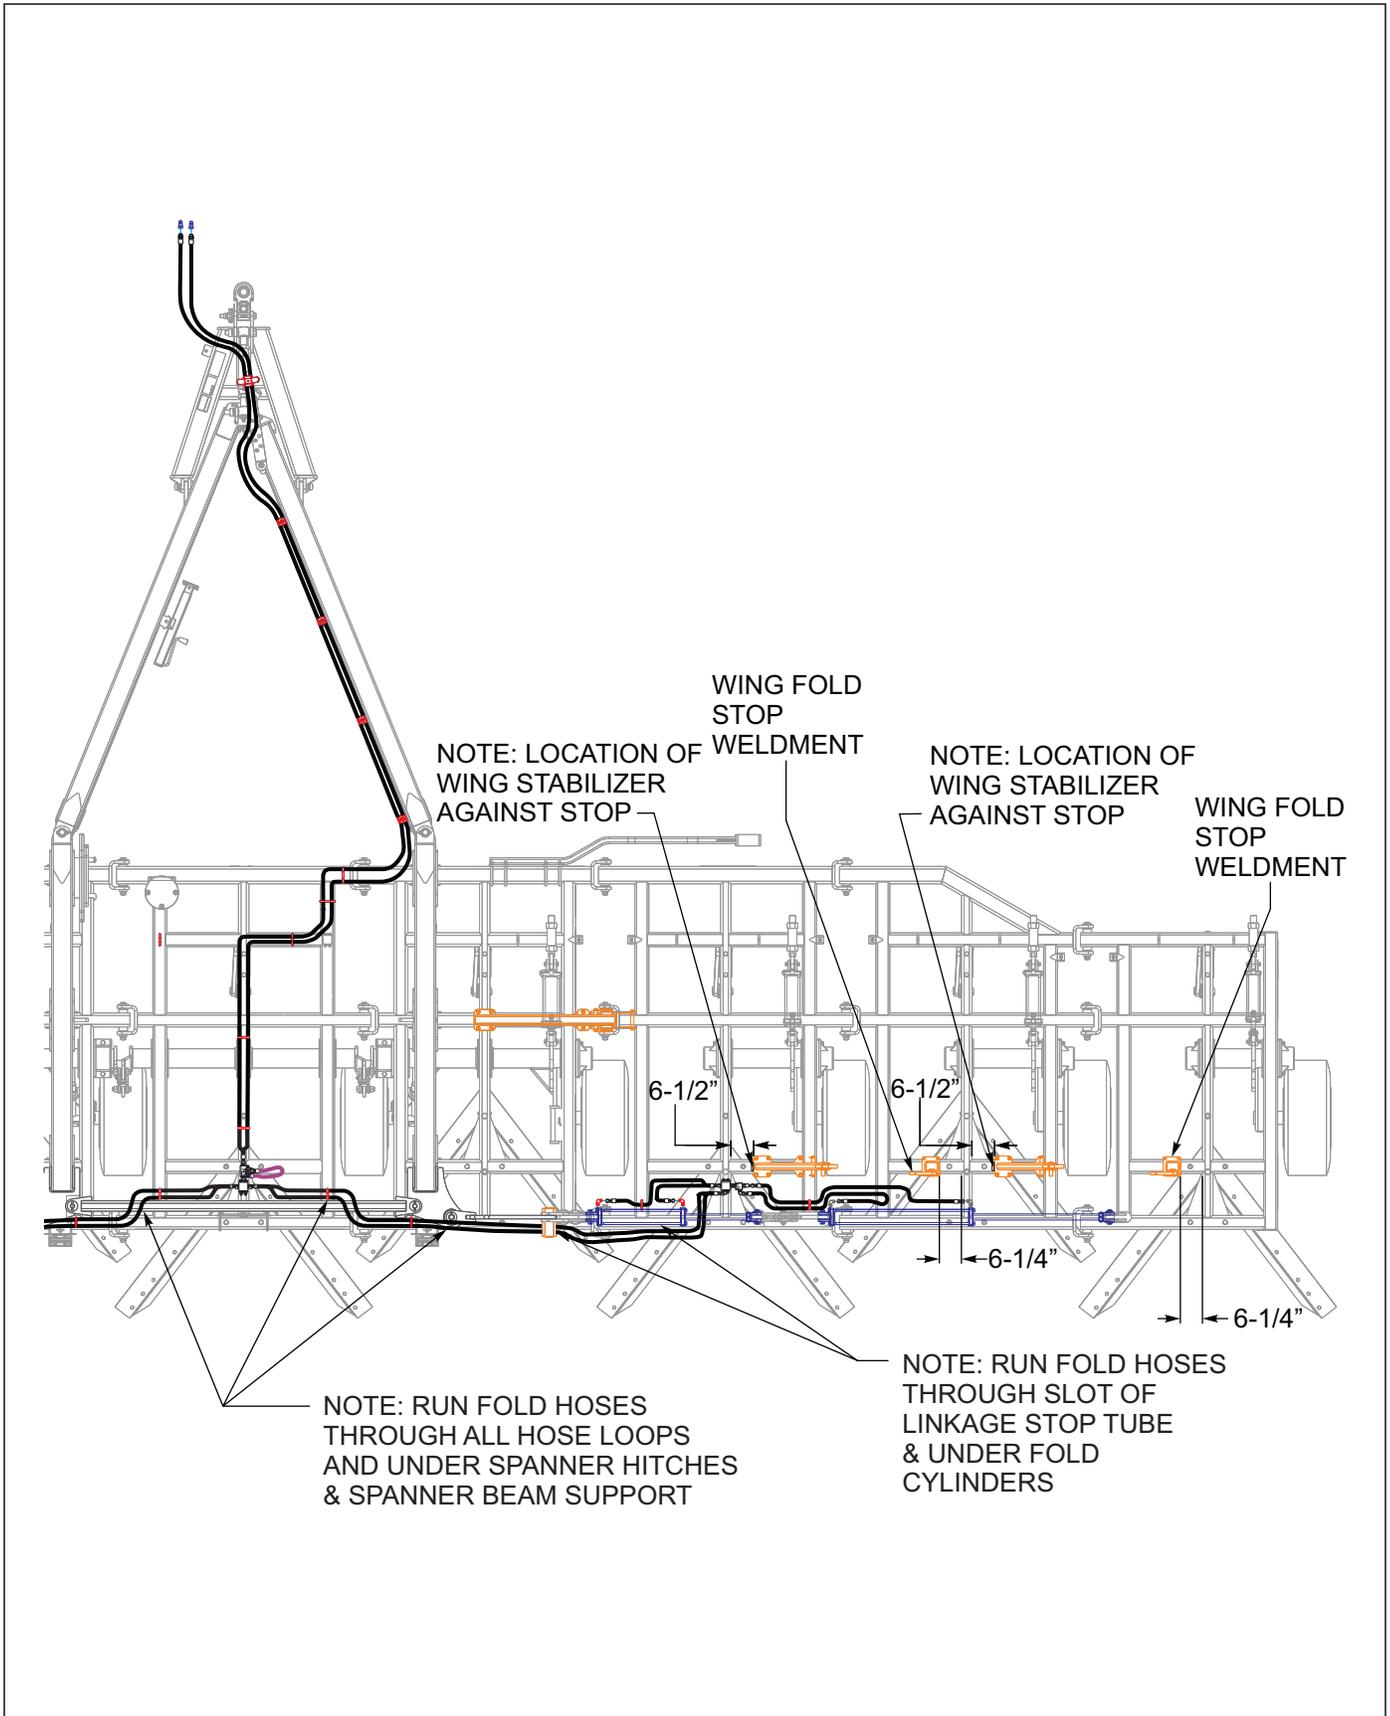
Hydraulic Fold Installation 1790-52'
